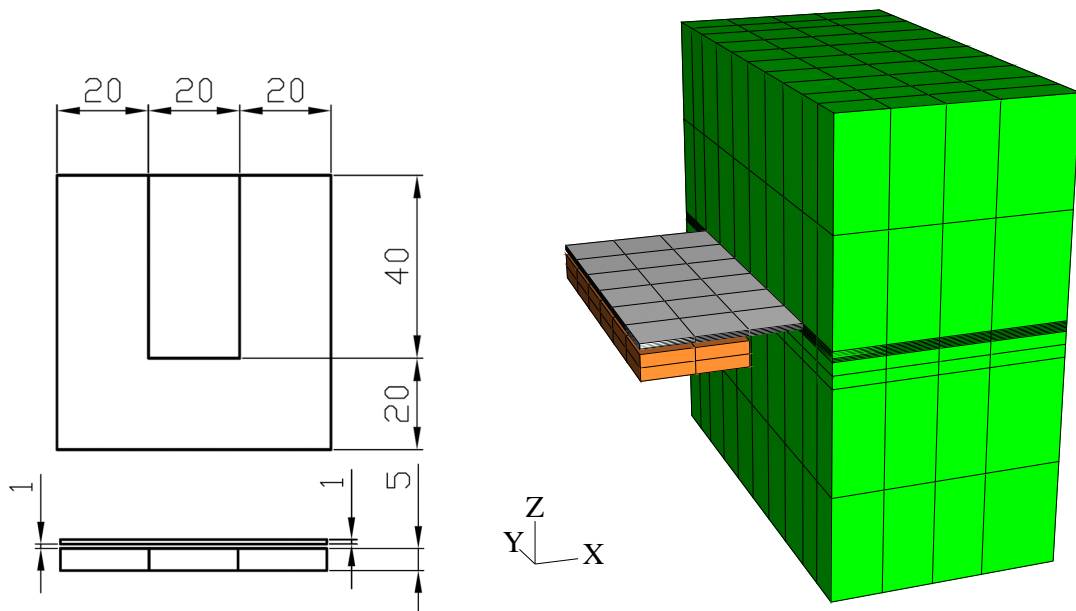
Left: Engineering drawing of the angled tool coil and upper work piece. Right: Discretized forming model with illustration of tool coil, sheet metal and surrounding air (only right half of air is displayed).
